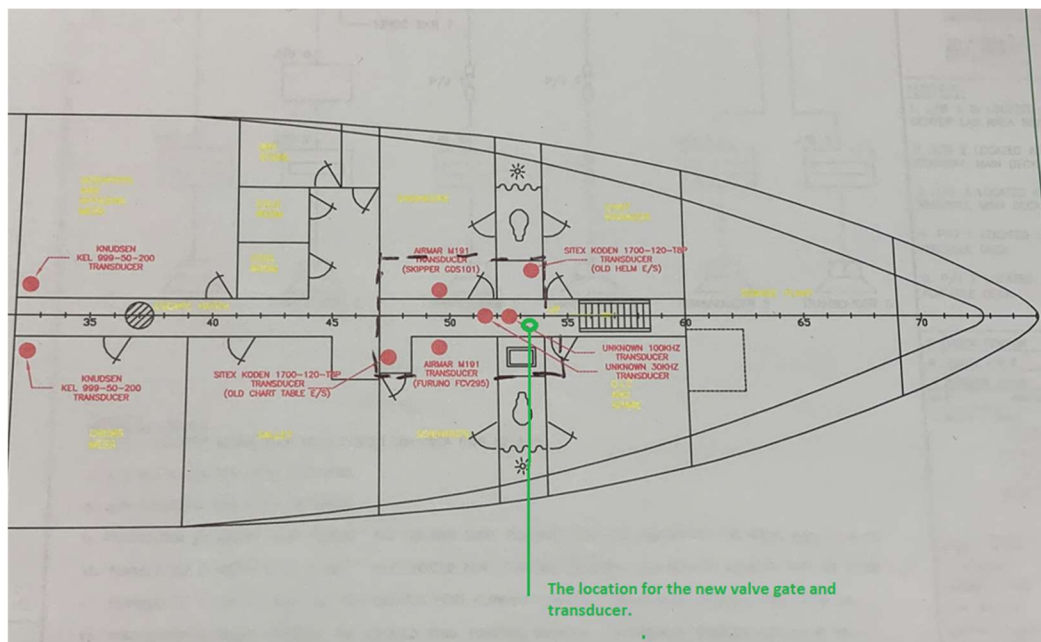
B - Gate Valve and Transducer Installation Drawing Location
